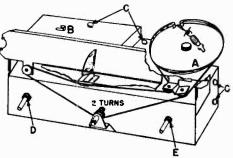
Radio Tuner Showing Chassis Cover and Dial Assembly.
